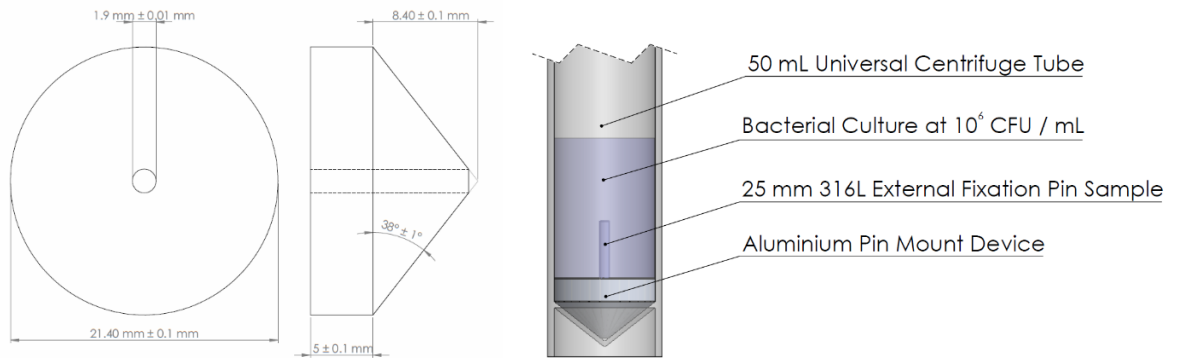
Technical drawing of pin mount device – Drawing of mount device (left) along with a diagram illustrating how the pin mount device fits into the universal centrifuge tube so that the pin can be supported virtually upright
